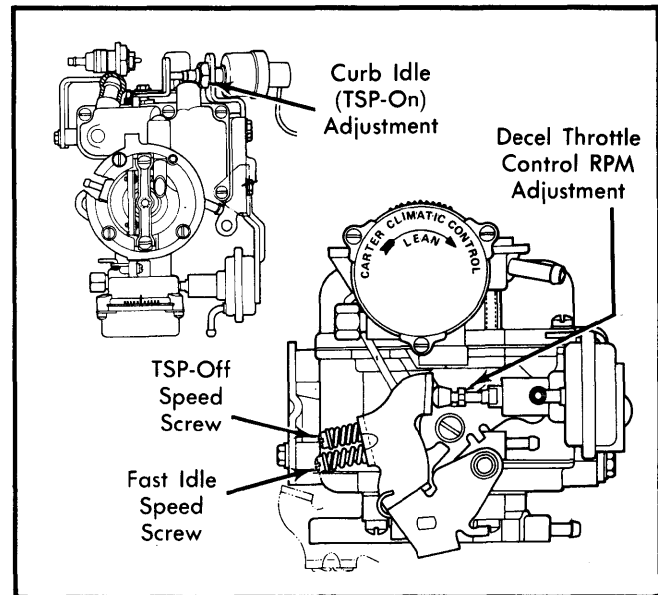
Adjusting YFA 1-Bbl. Carburetor on 4.9L Engines (Heavy Duty)
